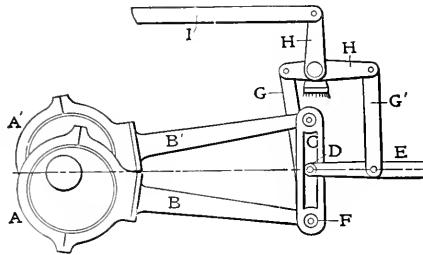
ALLAN STRAIGHT-LINK GEAR
